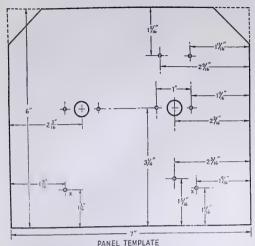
Panel template, with dimensions for drilling the necessary holes. If Bud condensers are used, the two small holes each side of the larger holes will not be necessary.
